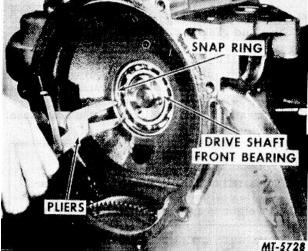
Removing Injection Pump Drive Shaft Front Bearing Snap Ring.
